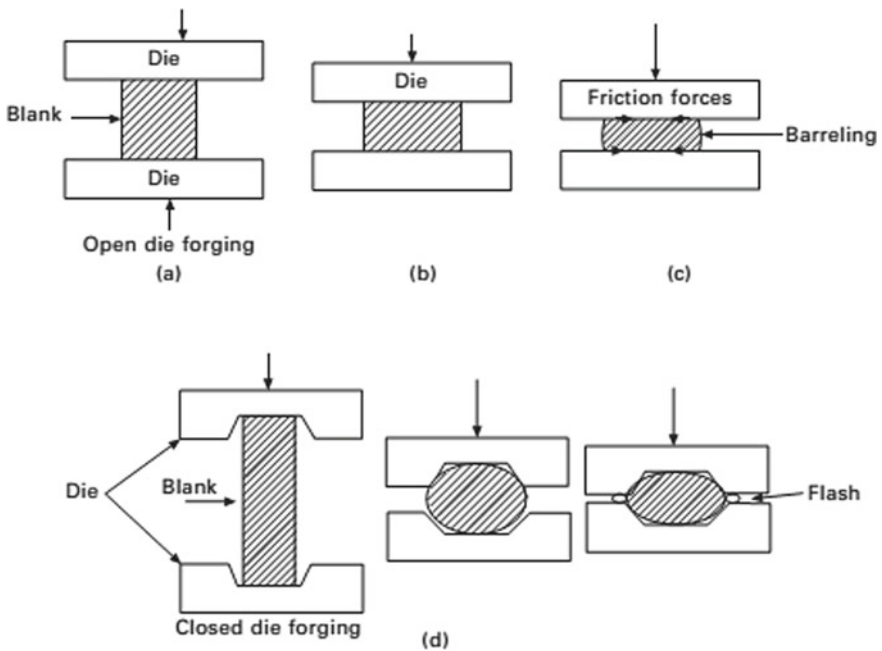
Open-die (a–c) and closed-die (d) forging processes [12]
